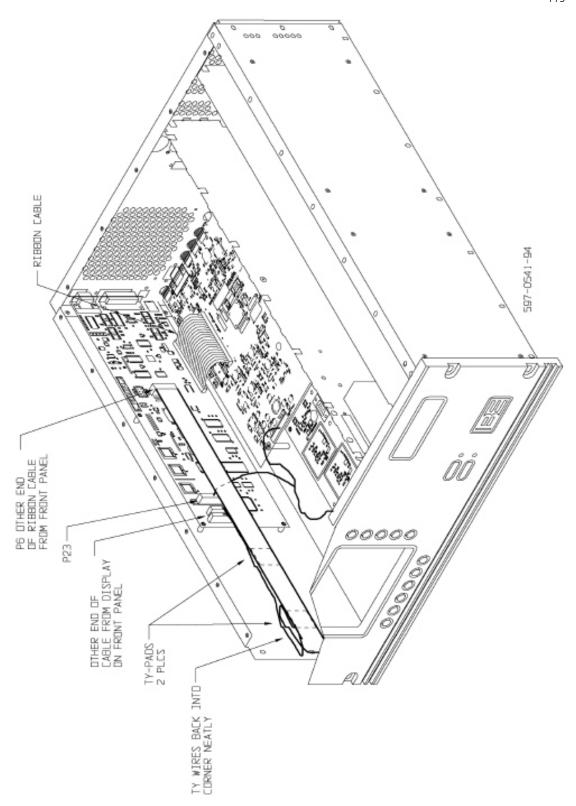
FXi CONTROLLER BOARD REMOVAL AND REINSTALLATION (SHEET 2 OF 2)
